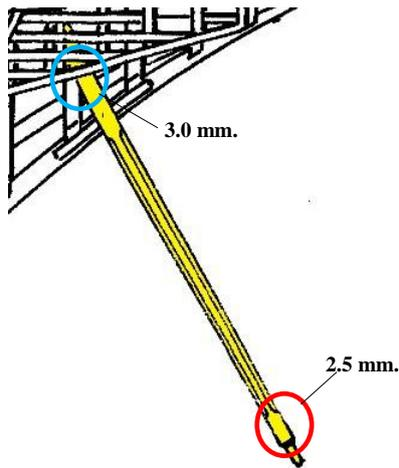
Boomkin Dimensions (Plan Sheet 2)
